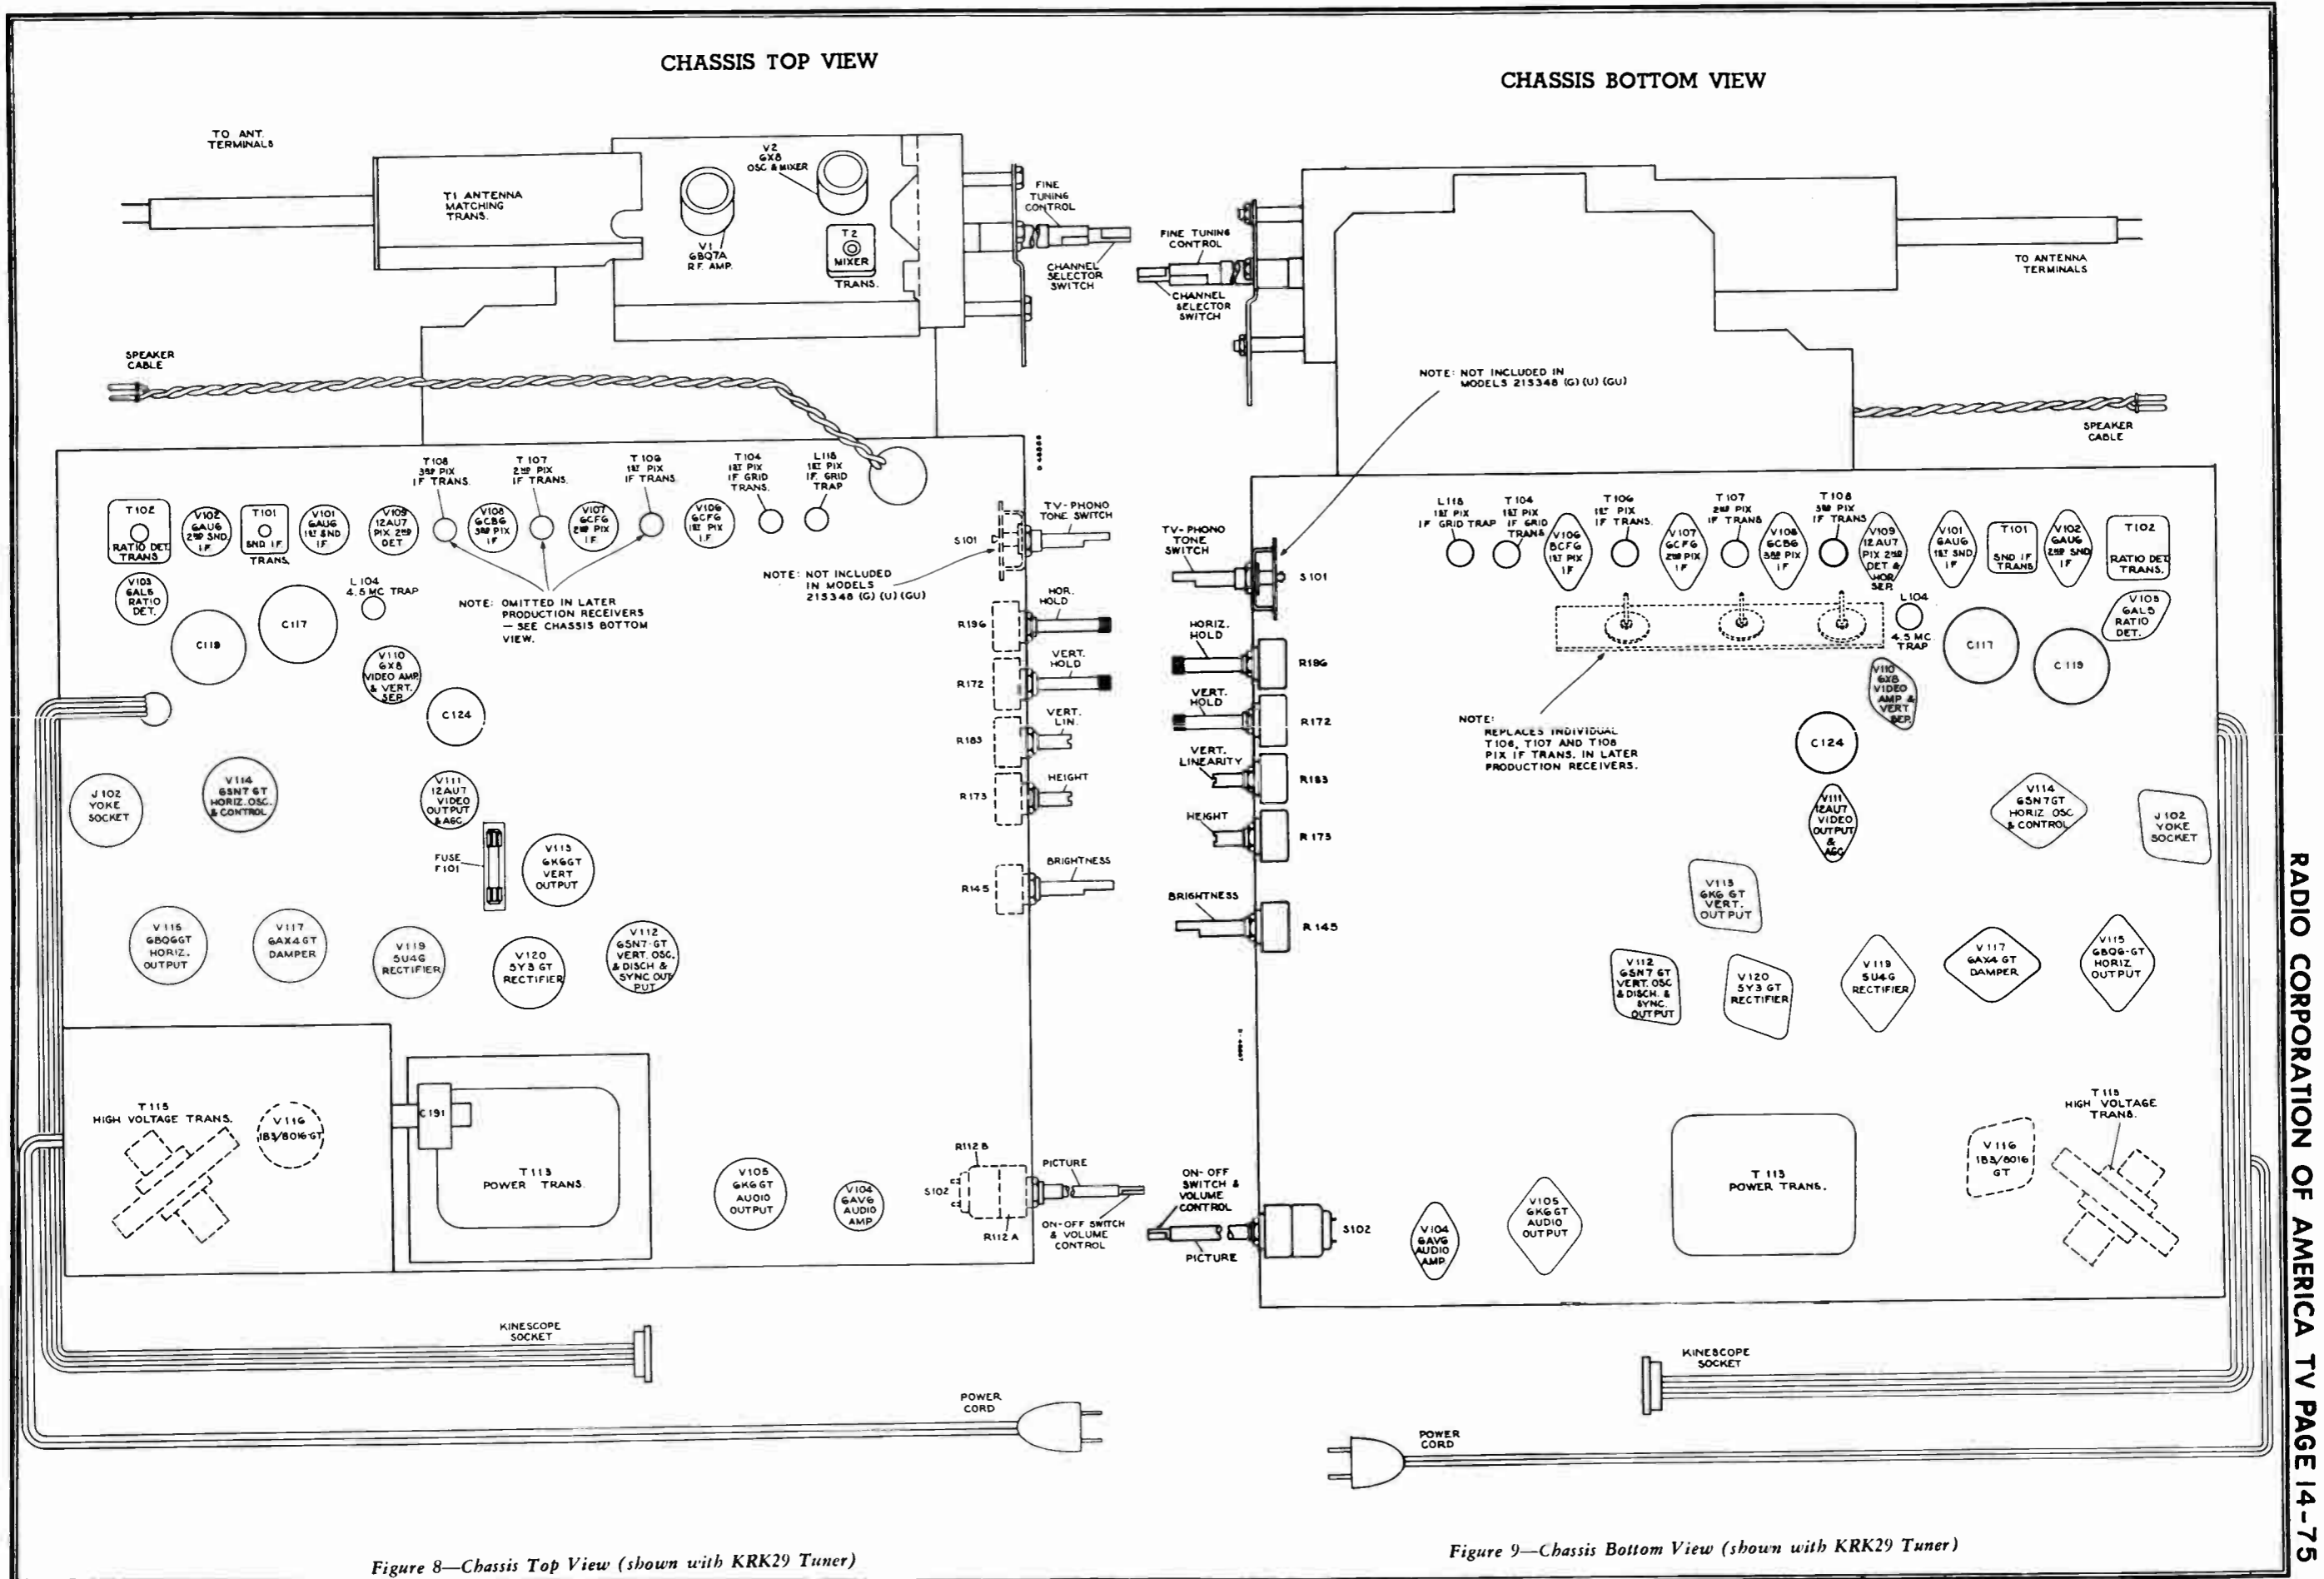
Chassis Top View (shown with KRK29 Tuner)
